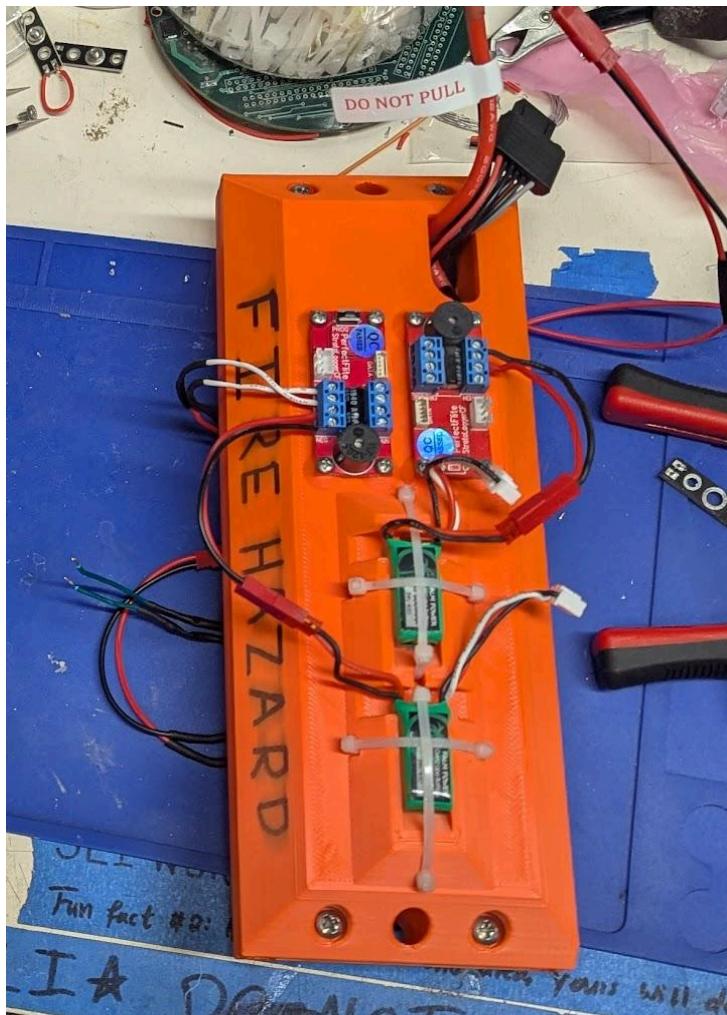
Electronics Bay Avionics Mounting Sled Assembly
